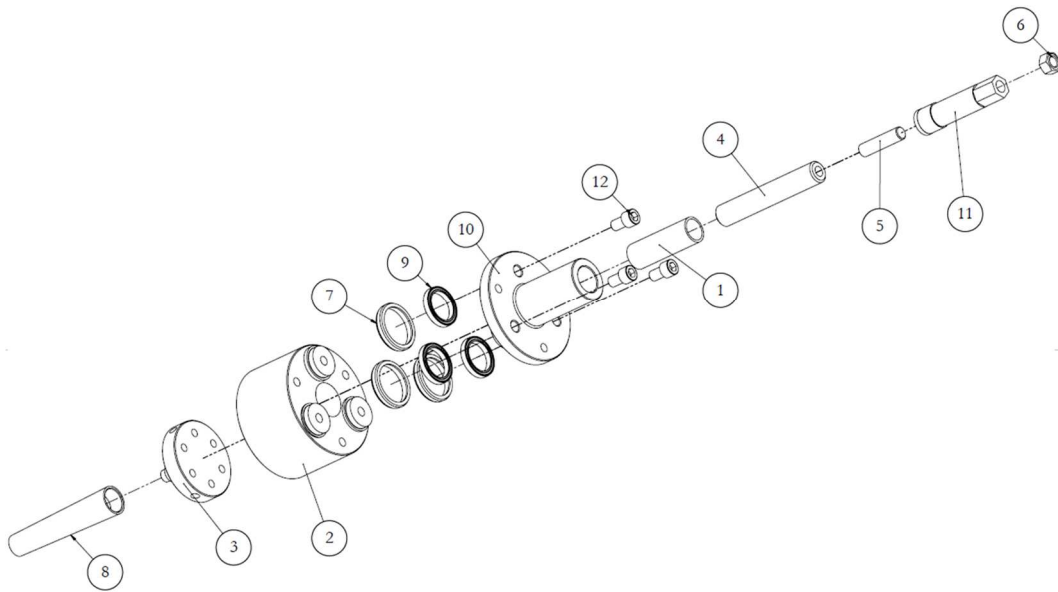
Exploded-view of the constrained backward tube flowforming setup.
